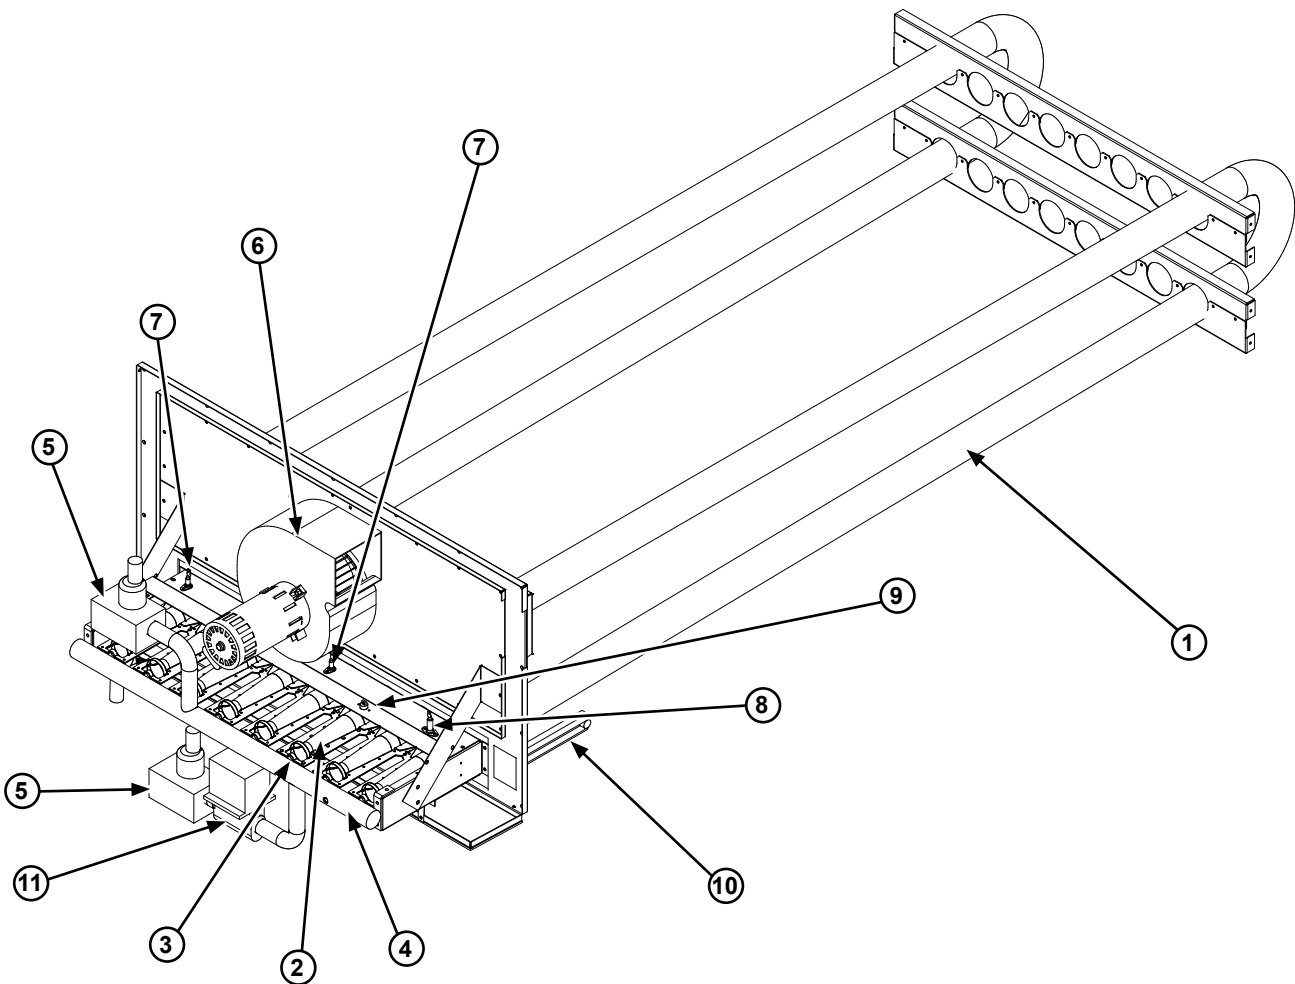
MODULATING HEAT EXCHANGER ASSEMBLY
